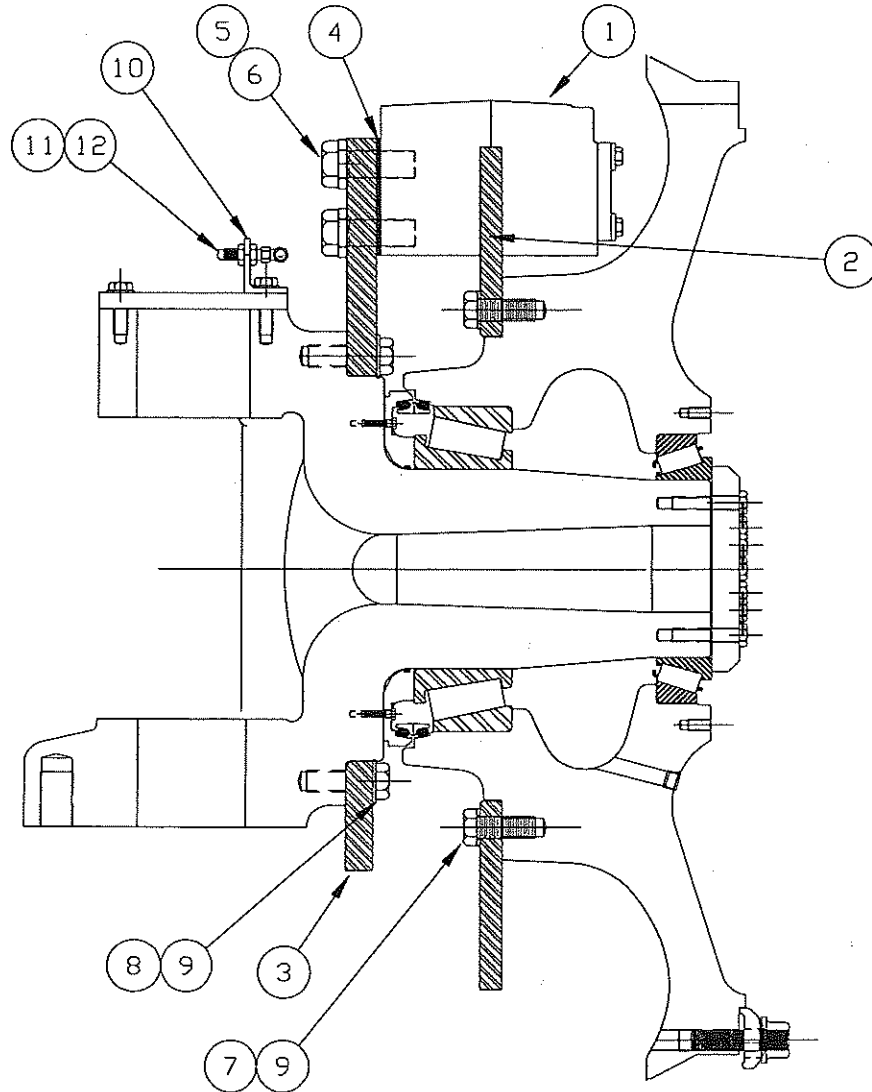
TRIPLE FRONT CALIPER INSTALLATION - MT 3300, 3600, 3700 (SHEET 1 OF 2)
